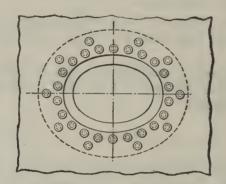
Method of Riveting Manhole Frames to Shells or Drums with Two Rows of Rivets
